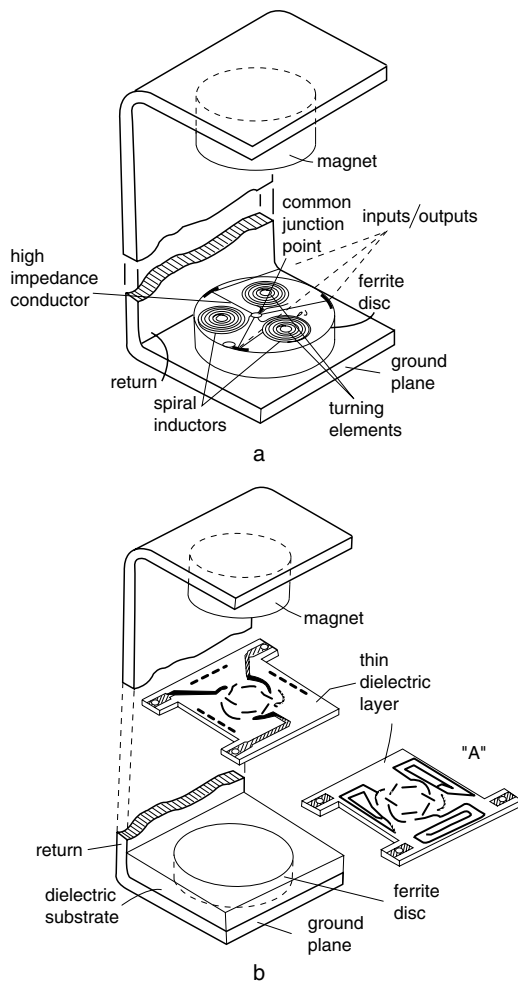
Isometric view of lumped element circulator: with circular spirals (a); using crossover print conductors and print spirals (b).
